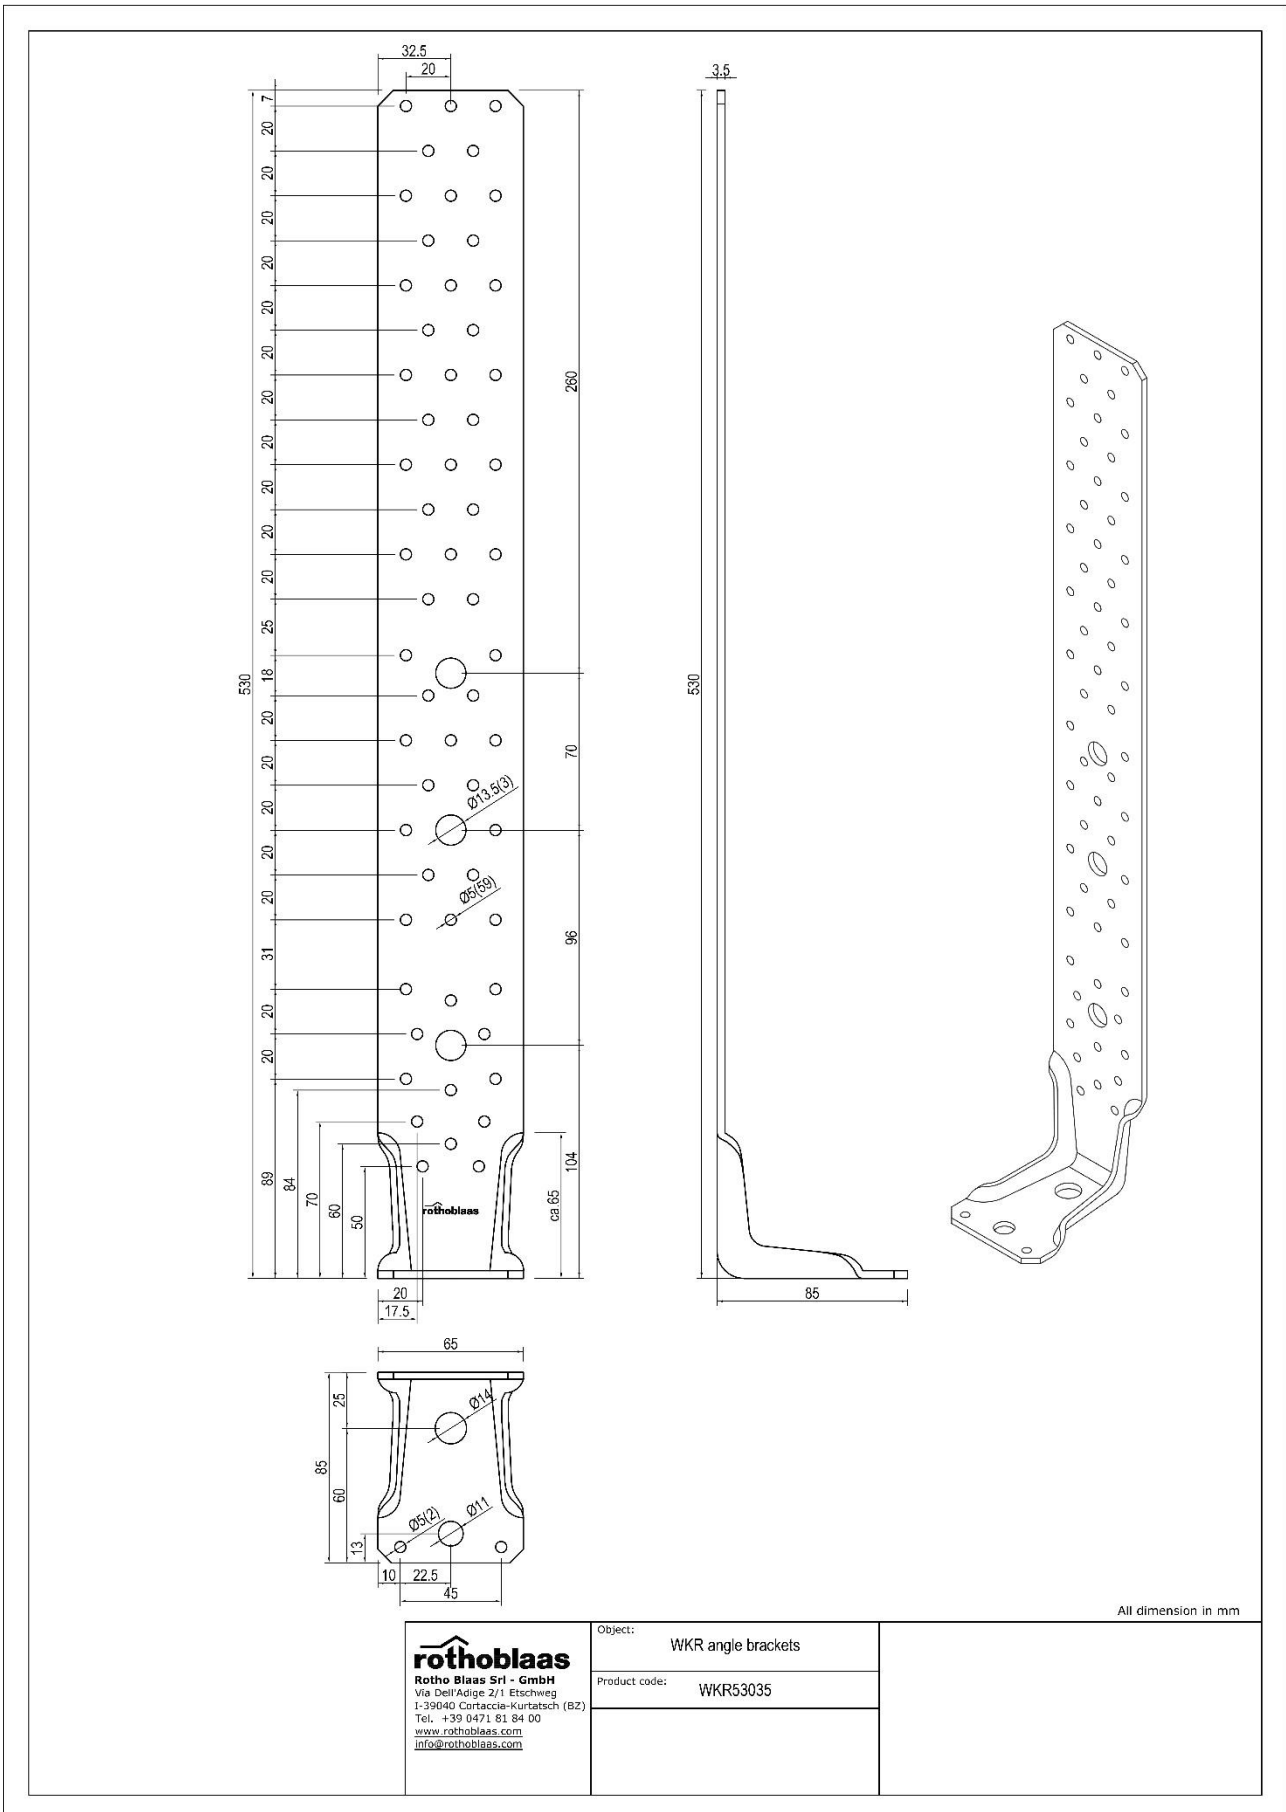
Dimensions of Rotho Blaas WKR53035
